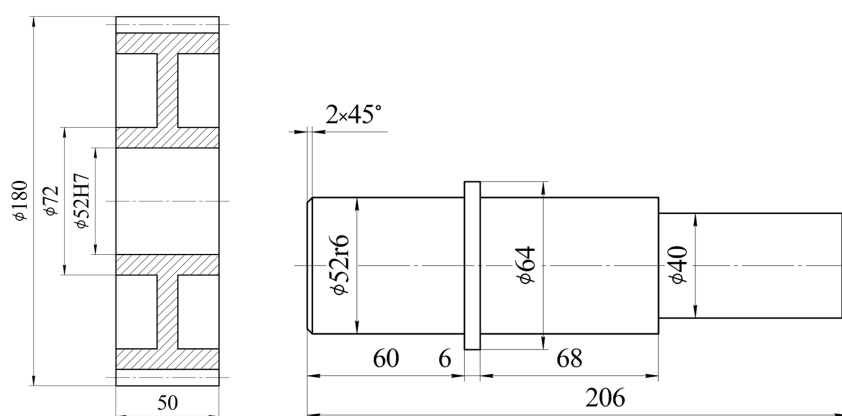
Full-scale sample of the bushing and shaft (bore diameter 52 mm)
